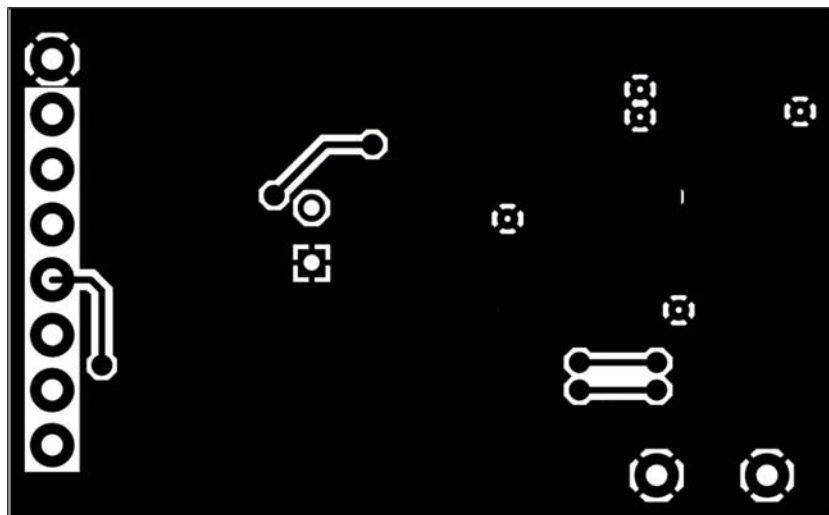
Atmel ATA6620/23/25 Development Board; Bottom Side, Top View (as if PCB Were Transparent)
